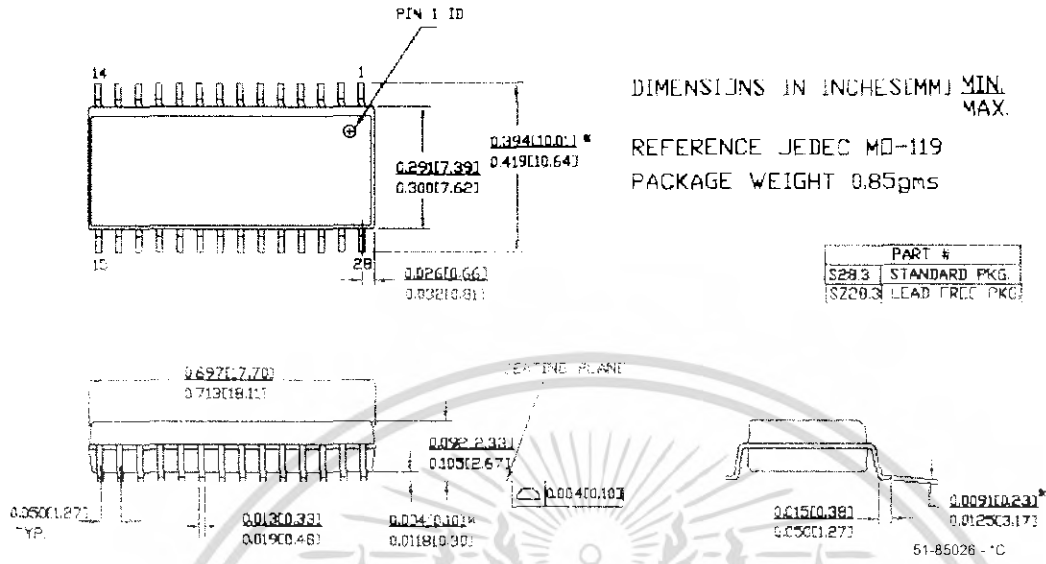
28-Lead (300-Mil) Molded SOIC
